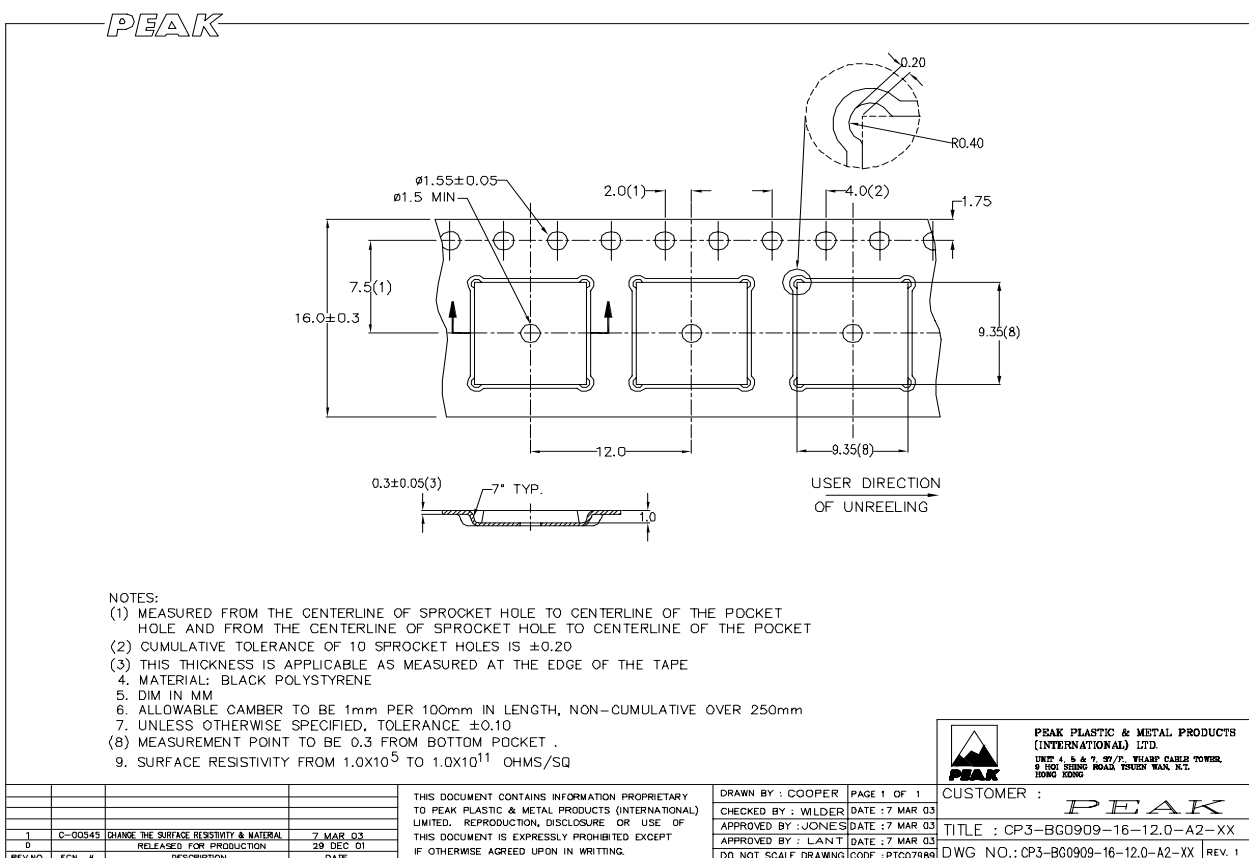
Example LGA-71 Tape and Reel Detailed Mechanical
